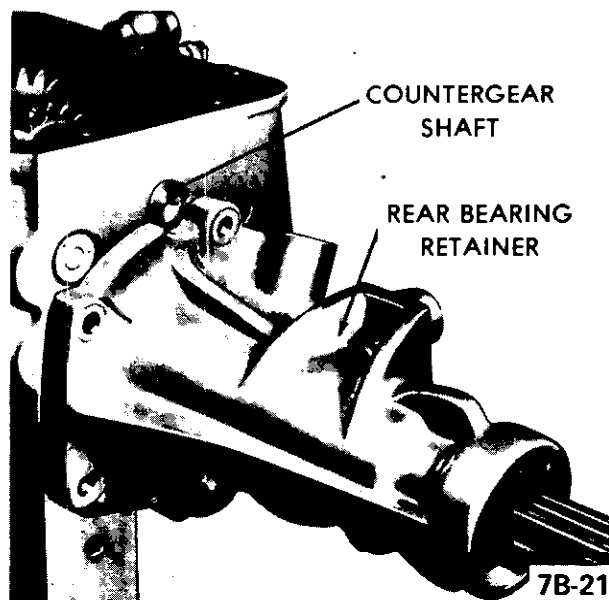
B-22 Position of Rear Bearing So Countergear Can Be Removed
